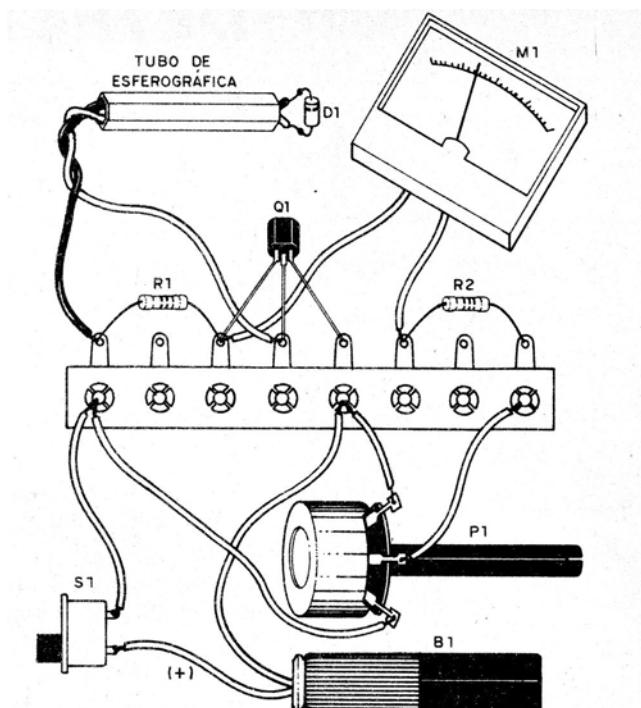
MOUNTING USING A TERMINAL STRIP
